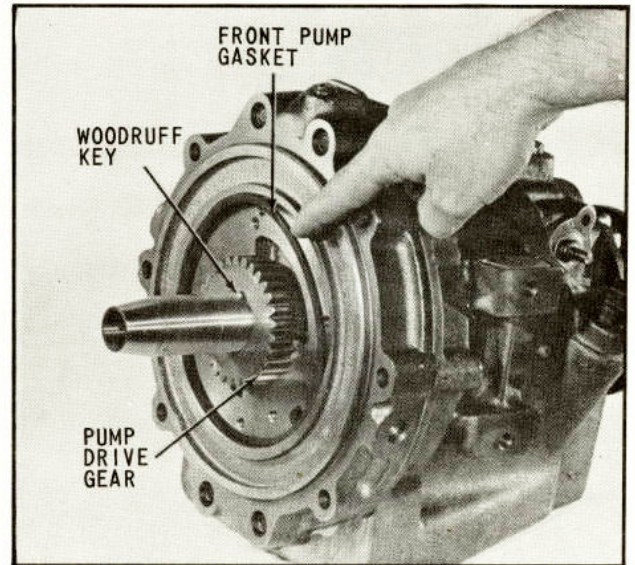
Installing Pump Drive Gear Key and Front Pump Gasket
